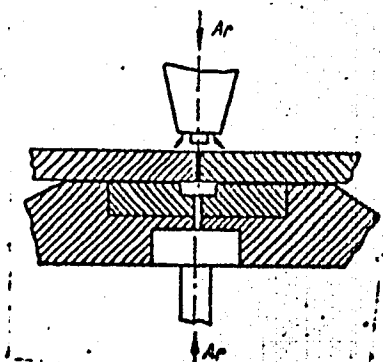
Two-sided protection of welded joint with argon.
